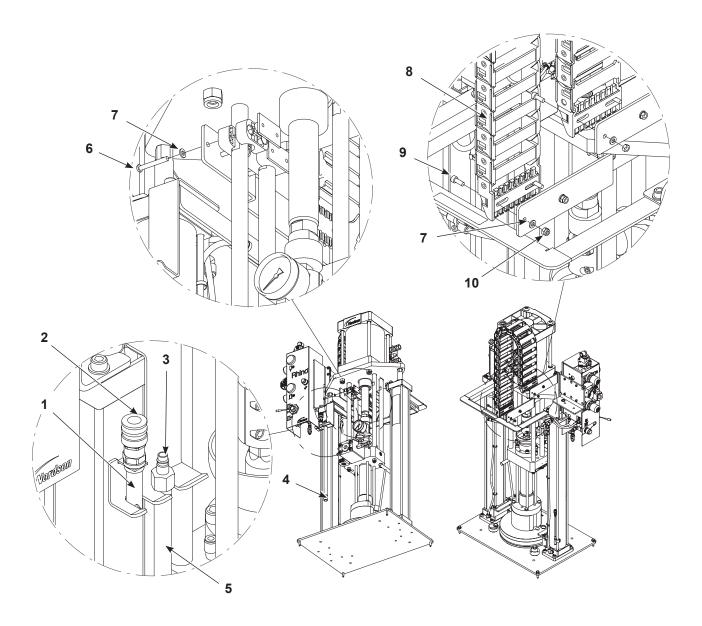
Dual Post Frame Interconnect Hose Module (100 - 200 mm) Air Cylinder (1 of 2)
